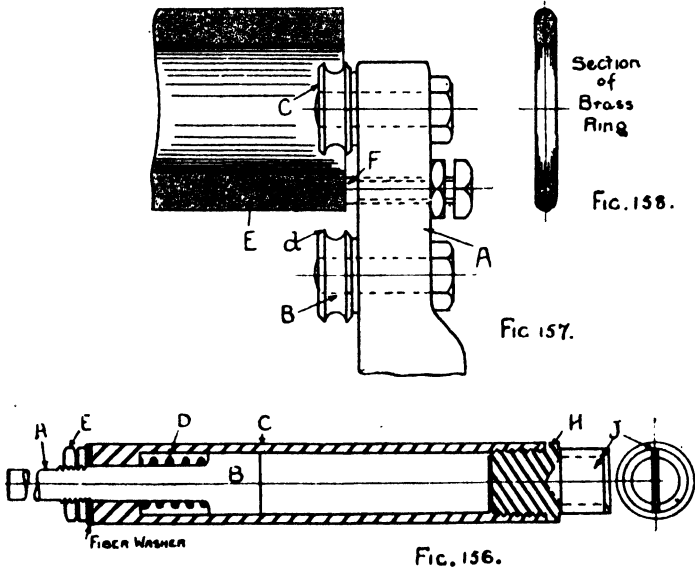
FRICTION SCREWDRIVER FOR ASSEMBLY WORK.
